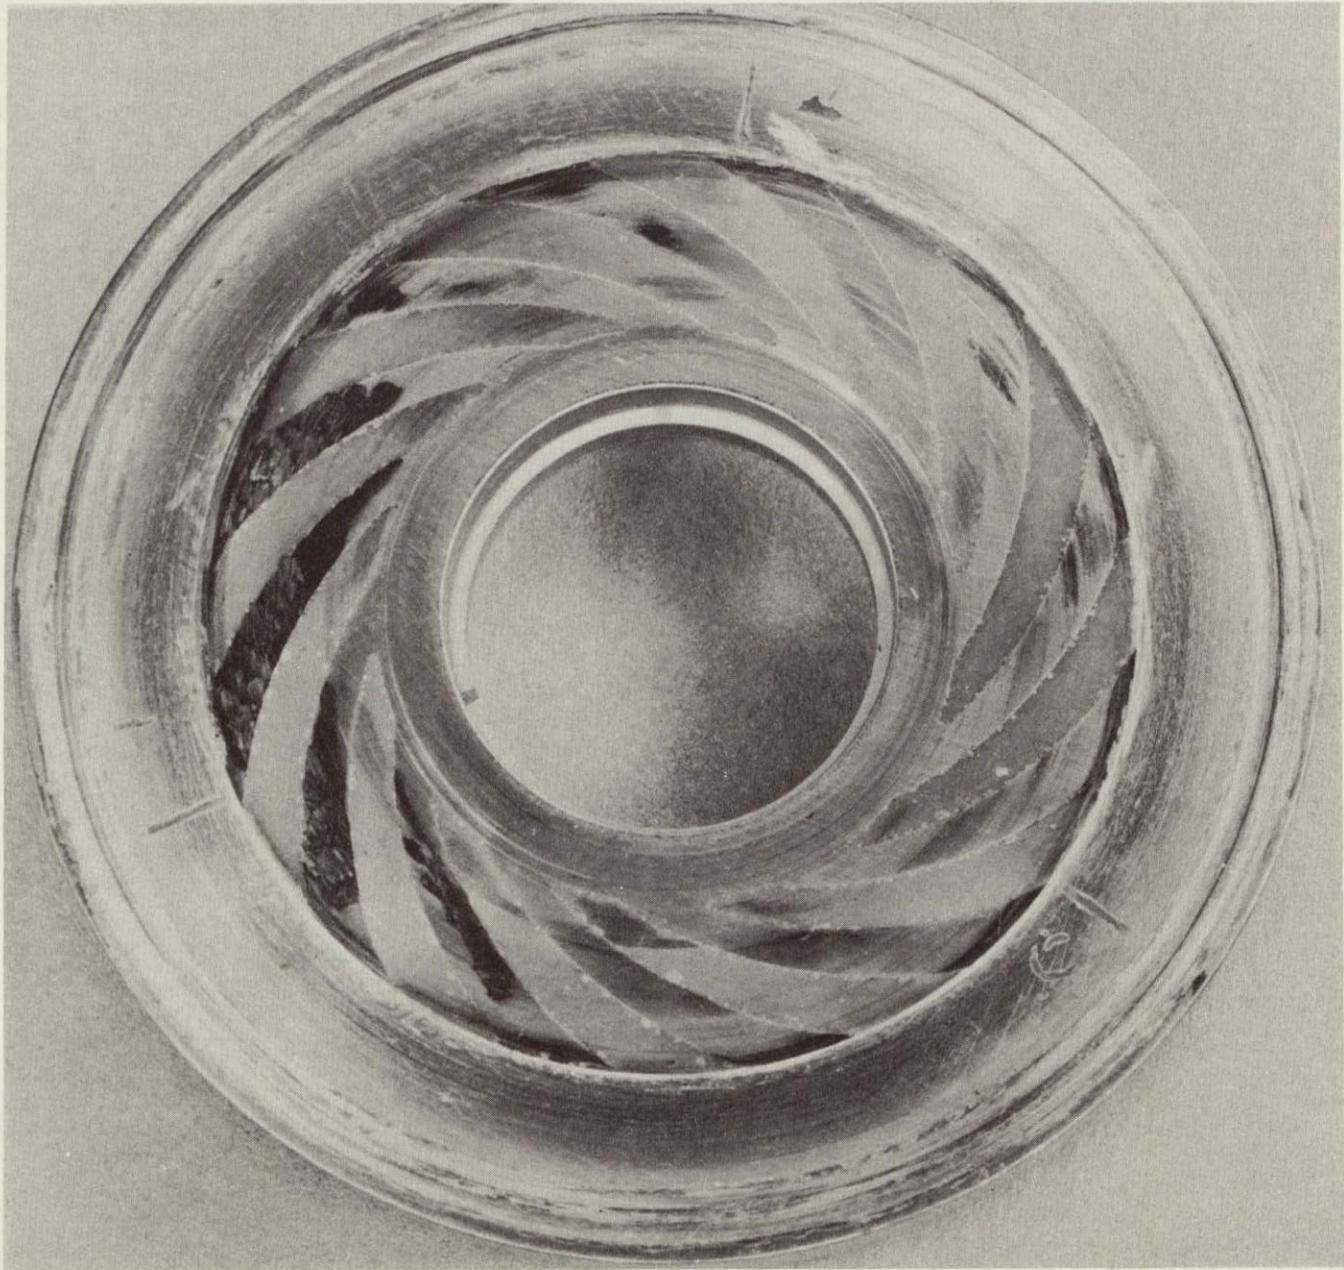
Spiral Groove LOX Seal Mating Ring (P/N C28-0812-10, S/N 01, Damaged by Bearing Failure Posttest 092)
